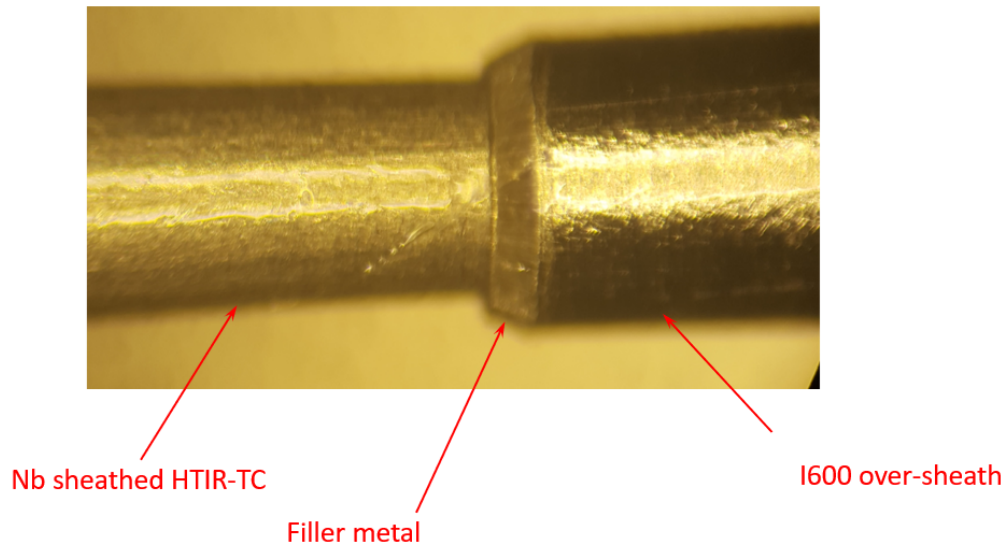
I600 welded to Nb sheathe HTIR-TC.
